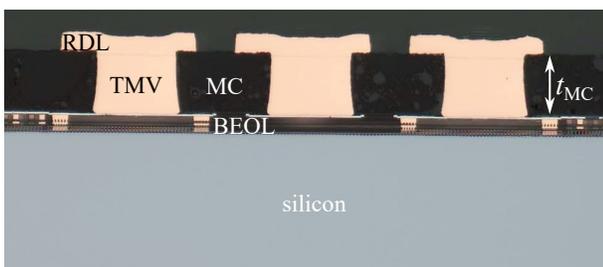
Microscope cross-section of assembled and packaged TMV interconnects.
